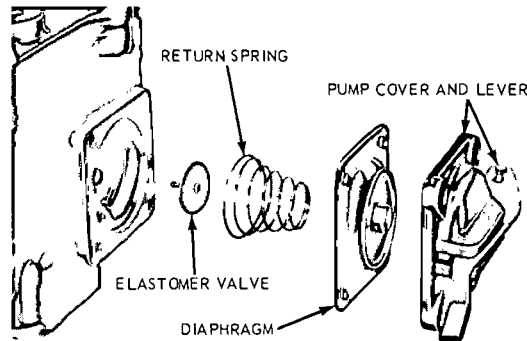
Accelerating Pump and Fuel Bowl Vent Valve Assembly
